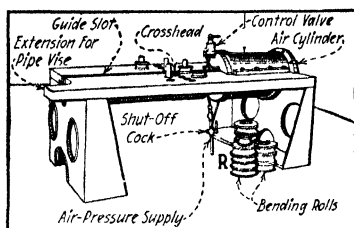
Pneumatic conduit bender designed, built and used in the Dectaur Shops of the Wabash Railroad. Similar benders are employed by the Southern Pacific Railroad and the Westinghouse Electric & Manufacturing Co. for bending conduit for car wiring. It requires only about $\frac{1}{2}$ min.—the time consumed by the piston in moving a stroke—to form a bend with the machine. Rolls, *R*, of various external diameters and having grooves of different sizes are provided for forming bends of different radii in tubes of different diameters. Air pressure is 100 lb. per sq. in. See Figs. 226 and 227 for details.
